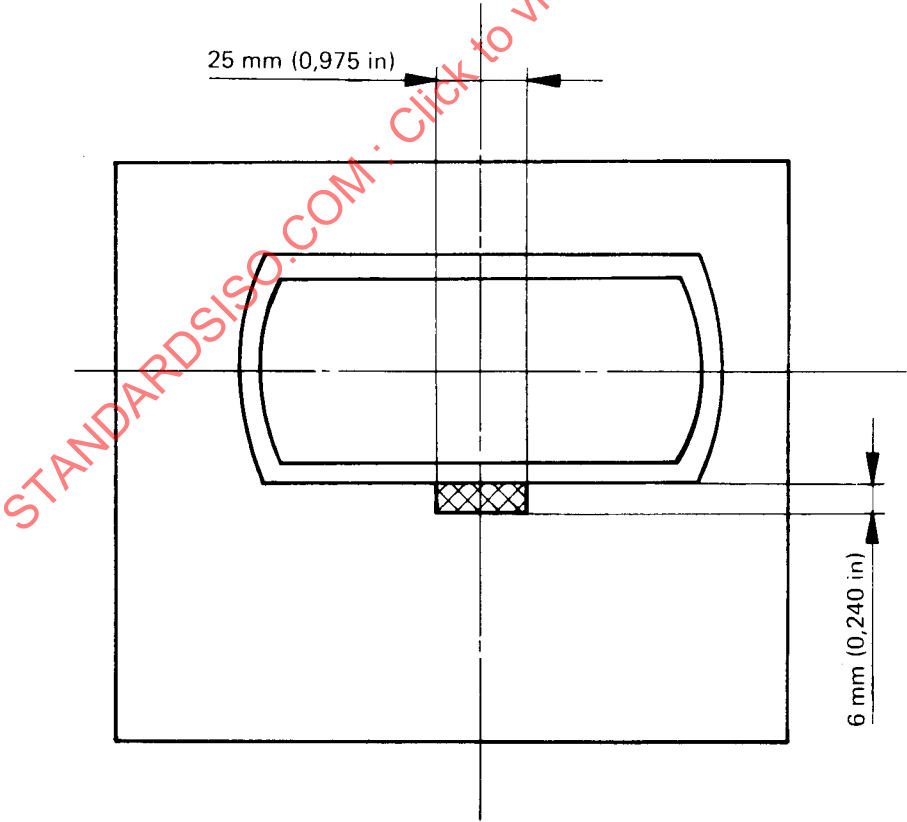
Bottom view of bottom corner fitting showing contact area (shaded) for misgather (push-up) load
